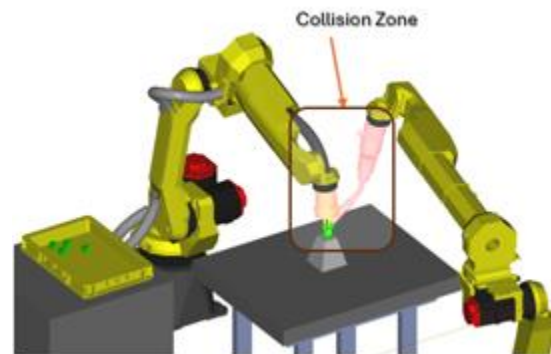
Full view of welding cell reproduced in Robot Guide 3D Environment VC Analysis
